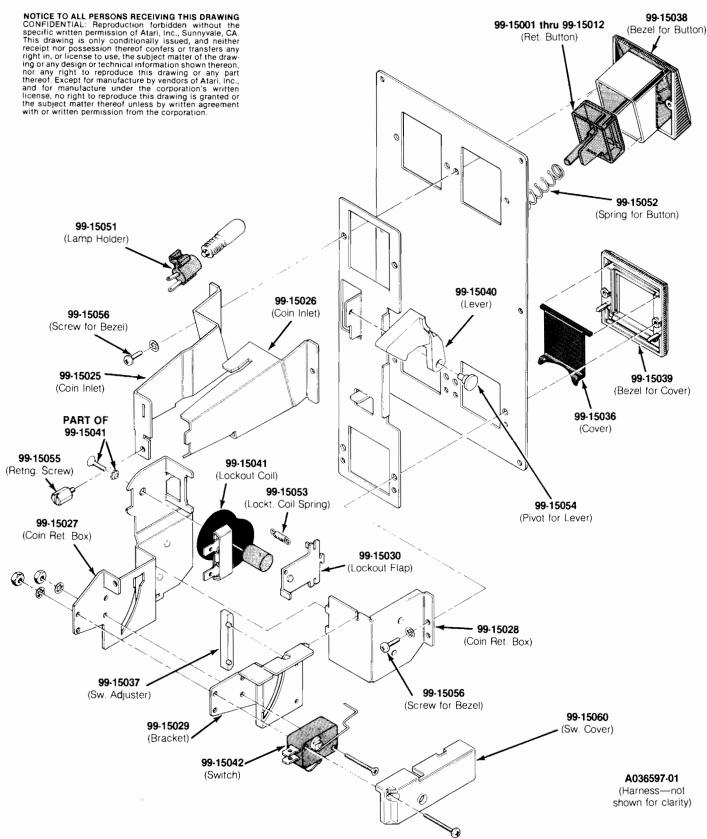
Double Coin Acceptor/Mount Assembly A036693-xx A
